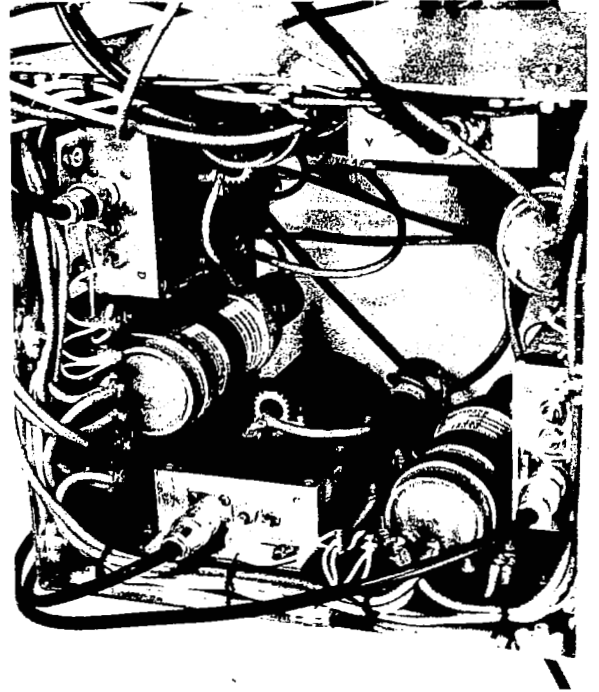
AFT END OF TRIGGER BOARDS ASSEMBLED
